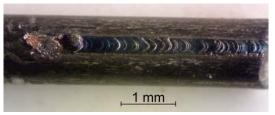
The micro welding seam at the contact point of FCW diameter 1,4 mm, drawn with Caand Na Soap, Remaining SH qty about 300 mg/m²
